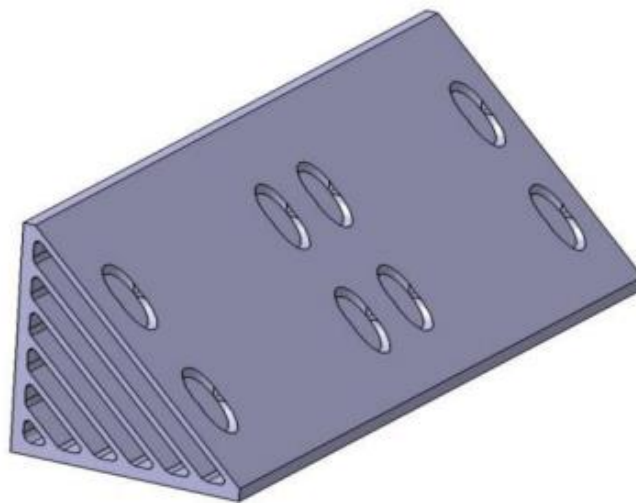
Example of new design manufactured in Ti6Al4V on EBM machine [54].
